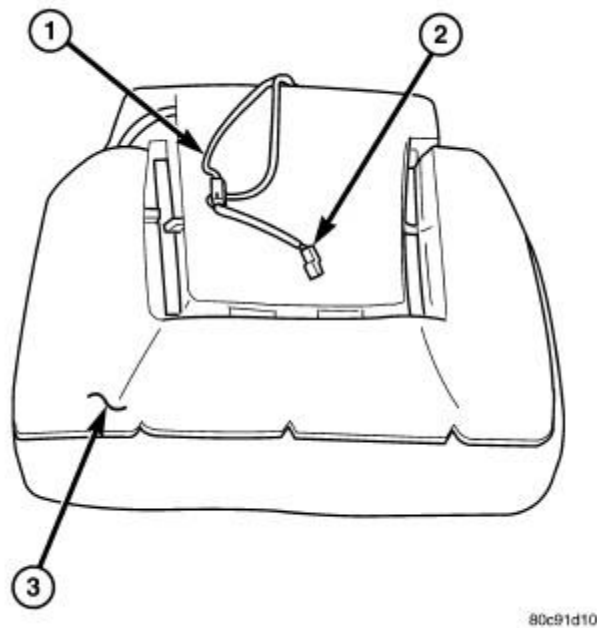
Heated Seat Element, Seat Cushion & Connector
